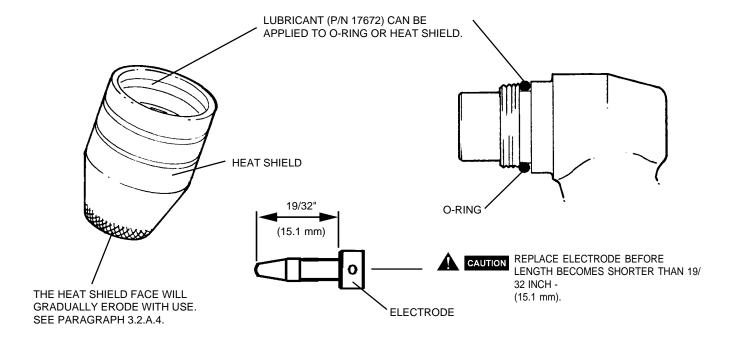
O-ring, Electrode, and Shield Maintenance
